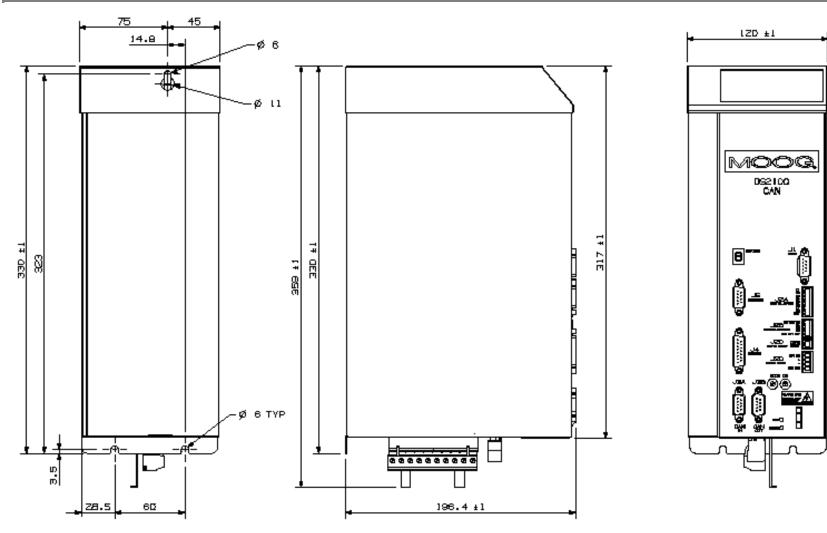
DS2100 B Mechanical & Mounting Dimensions
